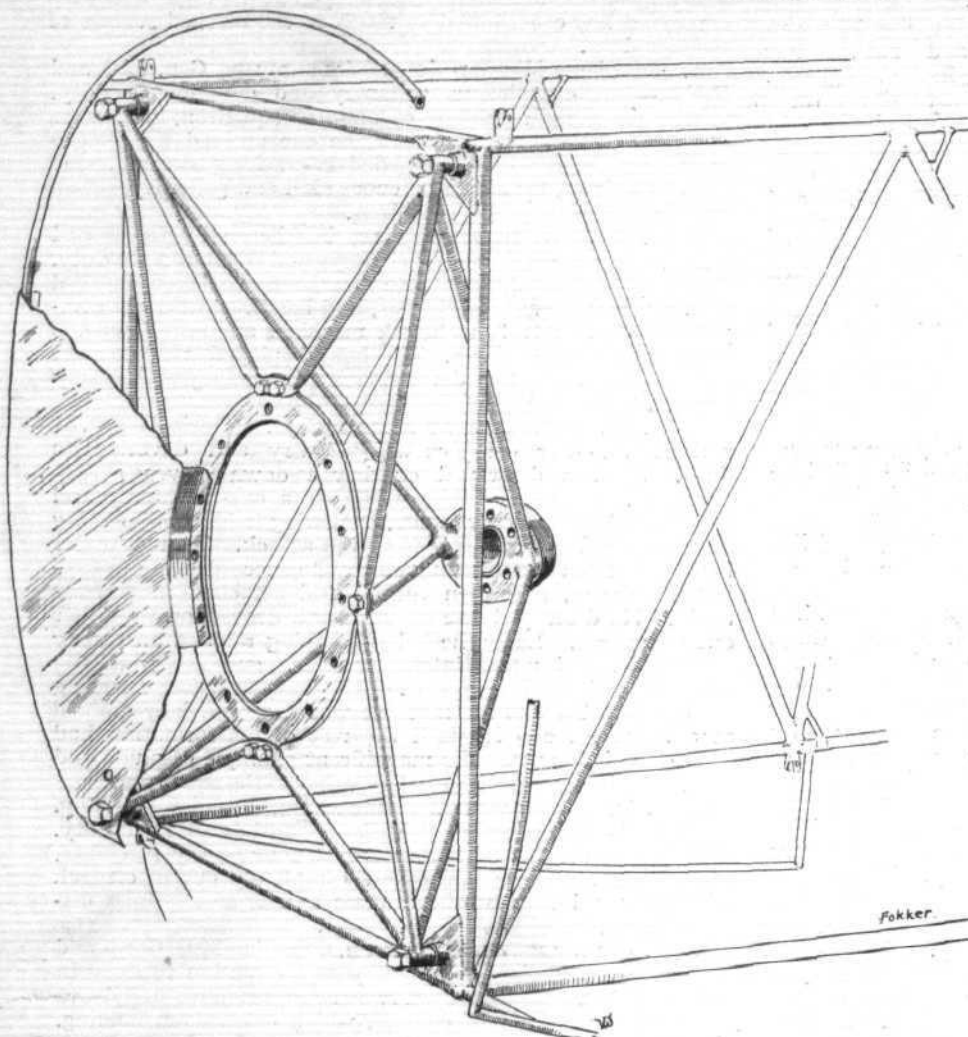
General arrangement of the engine mounting on the Fokker triplane.
